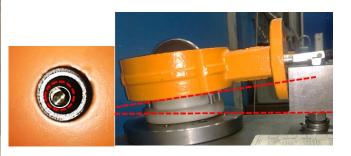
(a)Angular misalignment while mounting the body over the disc lead to misalignment of the shaft and the drive shaft hole. (b) The misalignment of the holes resists the shaft, and hence, the shaft cannot be inserted completely.
